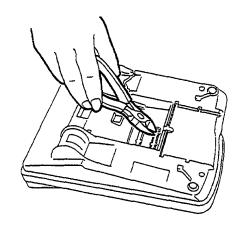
Remove the Knockouts to Install ADA(1)-W (BK)/(SW) Unit or ADA(2)-W (BK)/(SW) Unit
